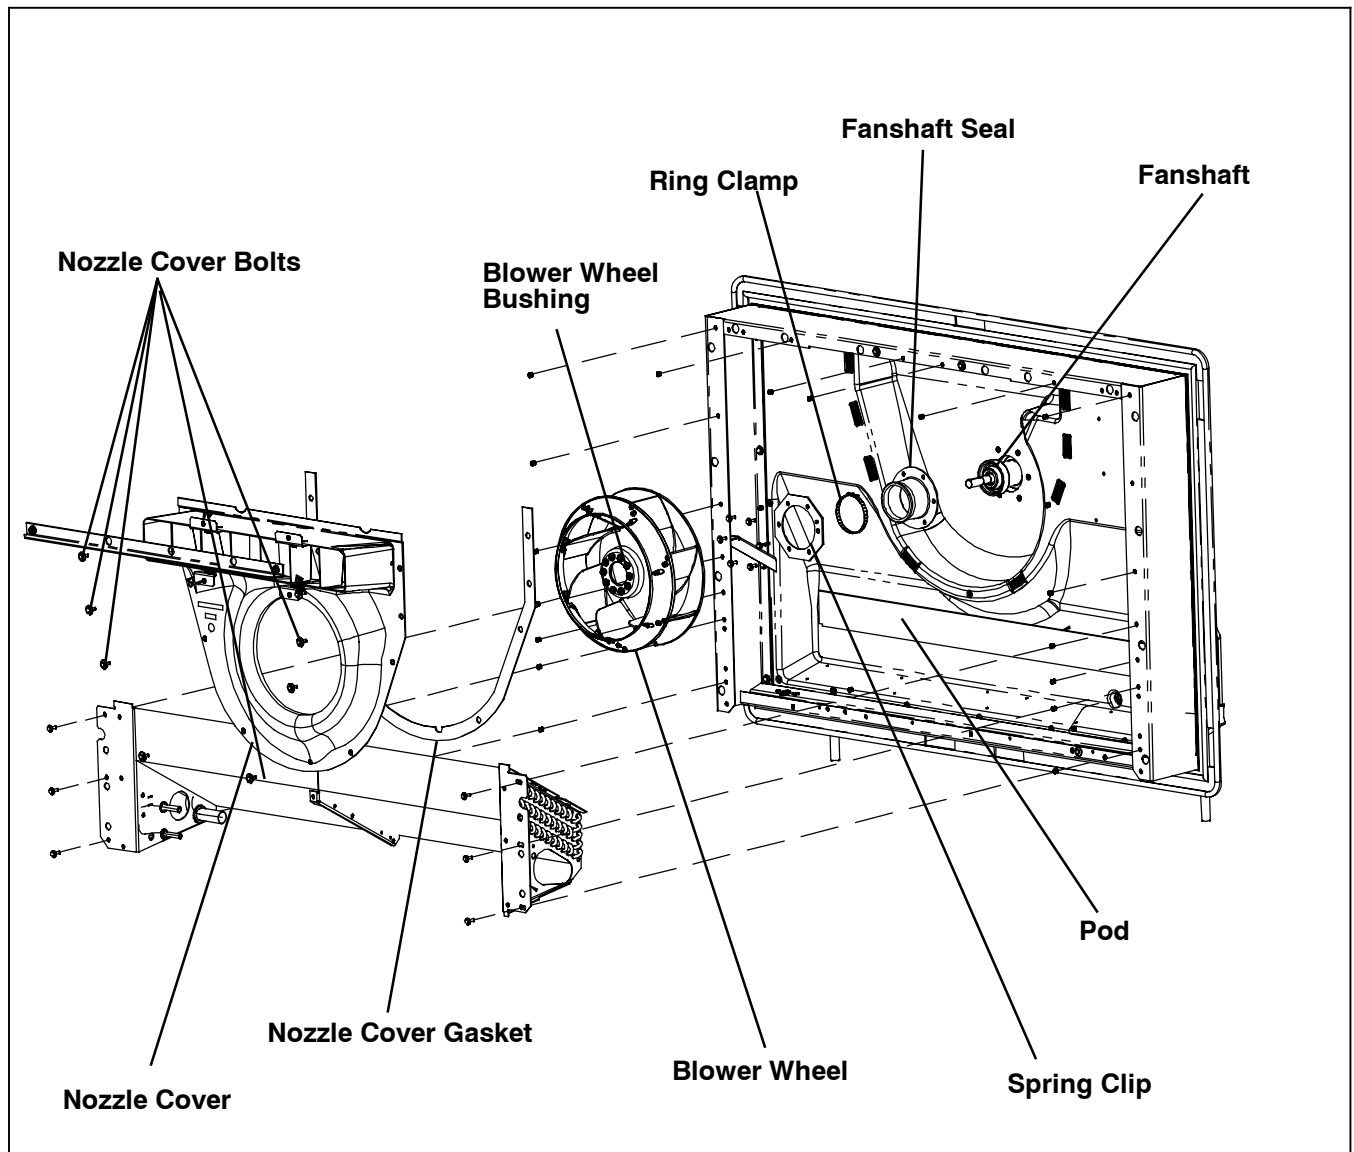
Blower Wheel And Nozzle Cover Assembly
